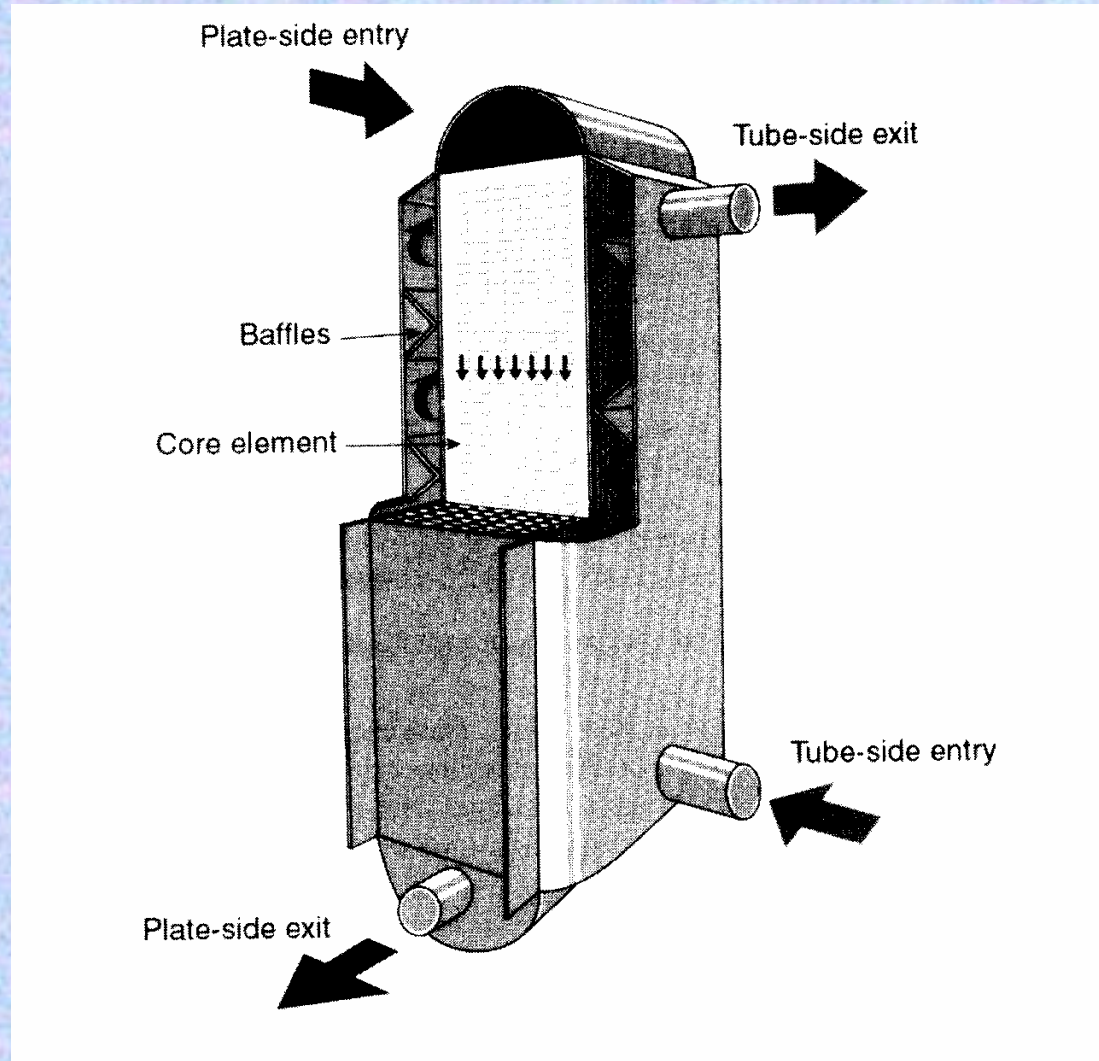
Bavex welded- plate heat exchanger.
